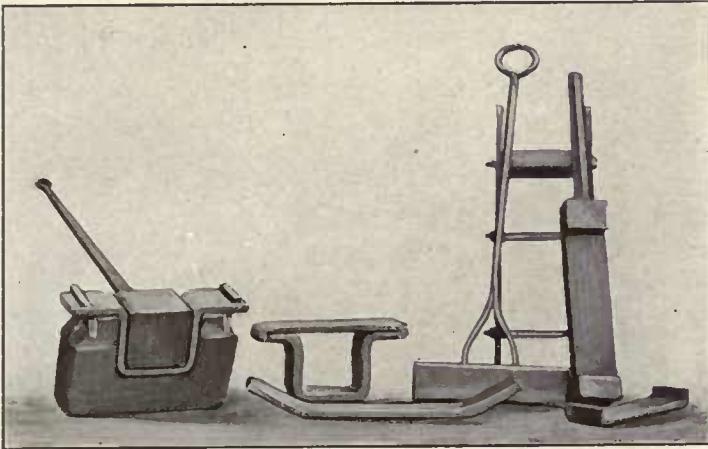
Tools for Forging Drawbar Carry Irons Under a Steam Hammer.
